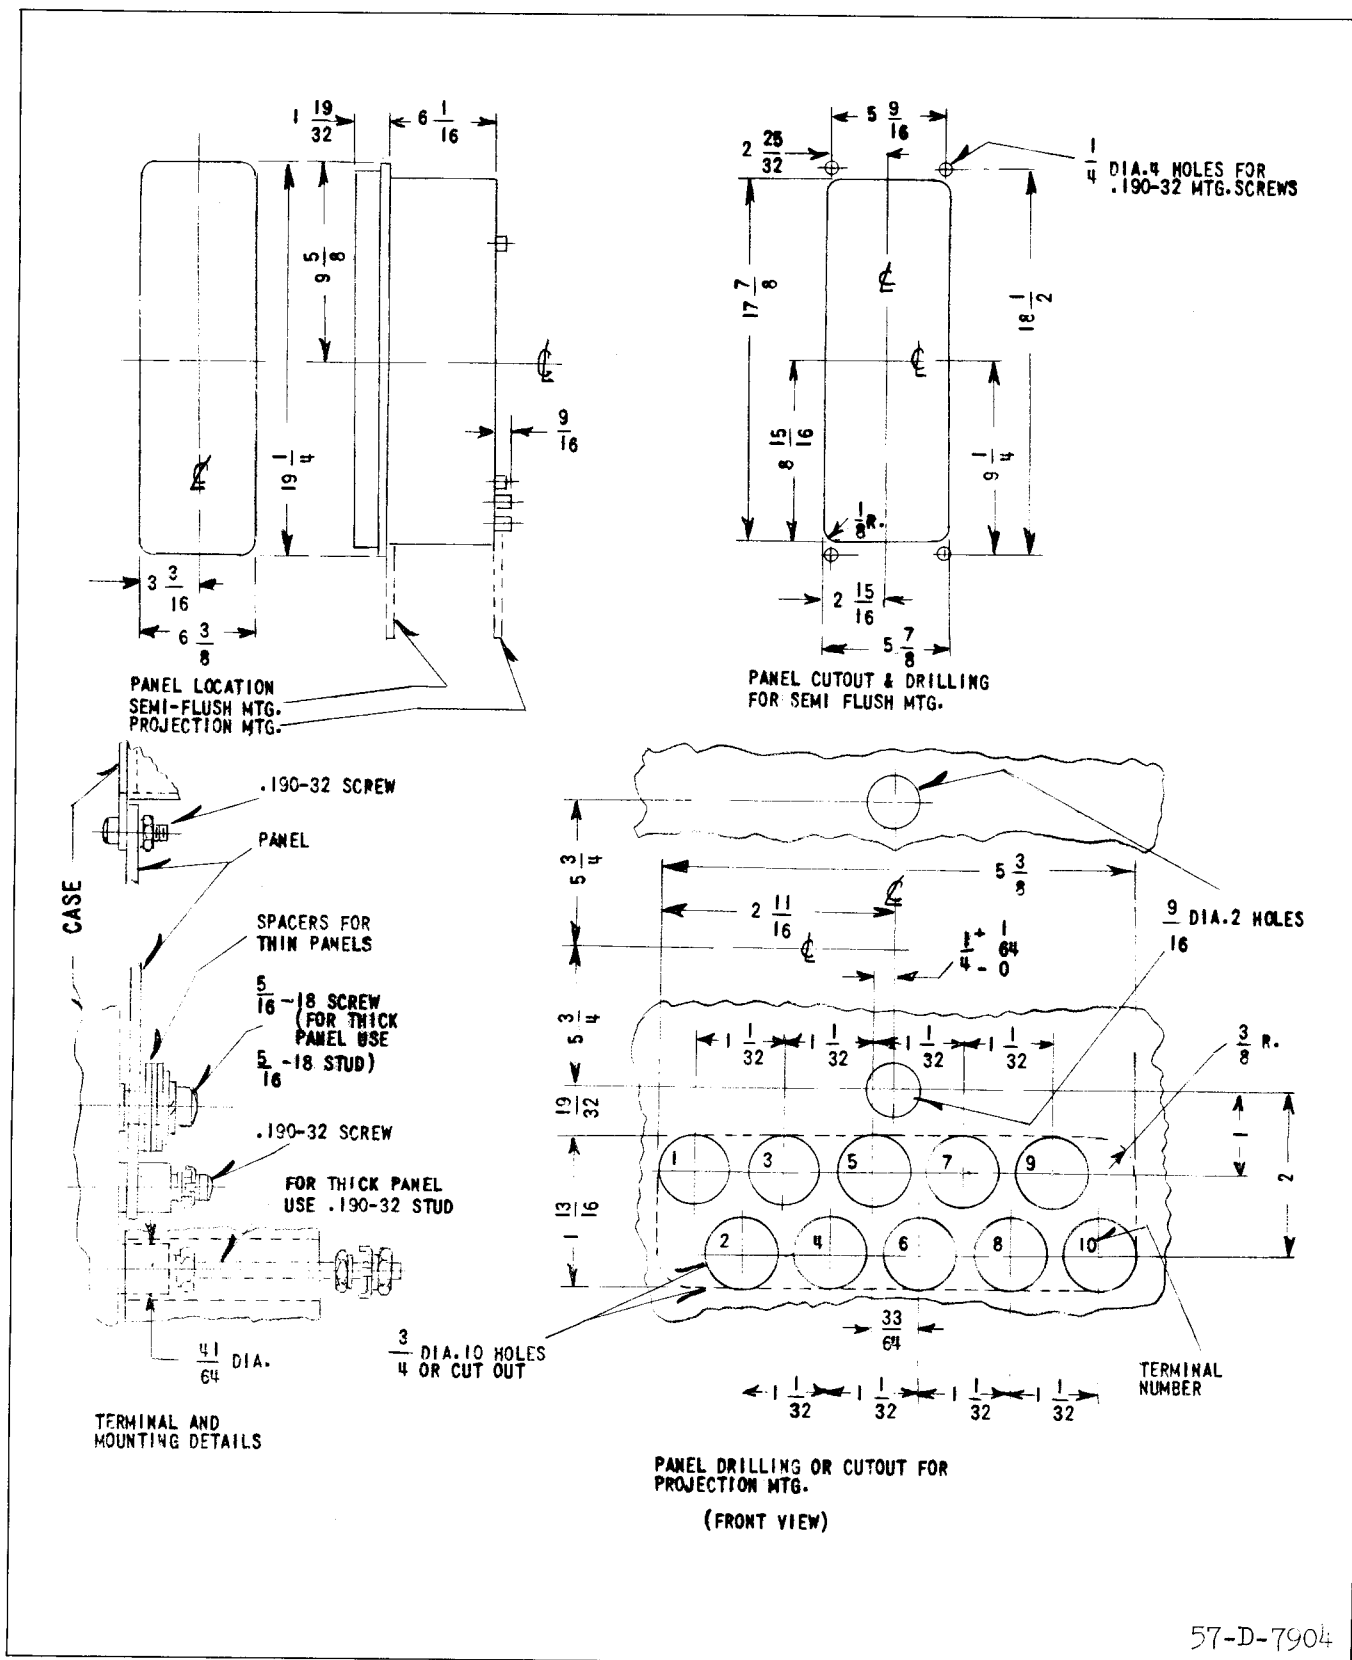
Outline and Drilling Plan for the Type FT22 Case
